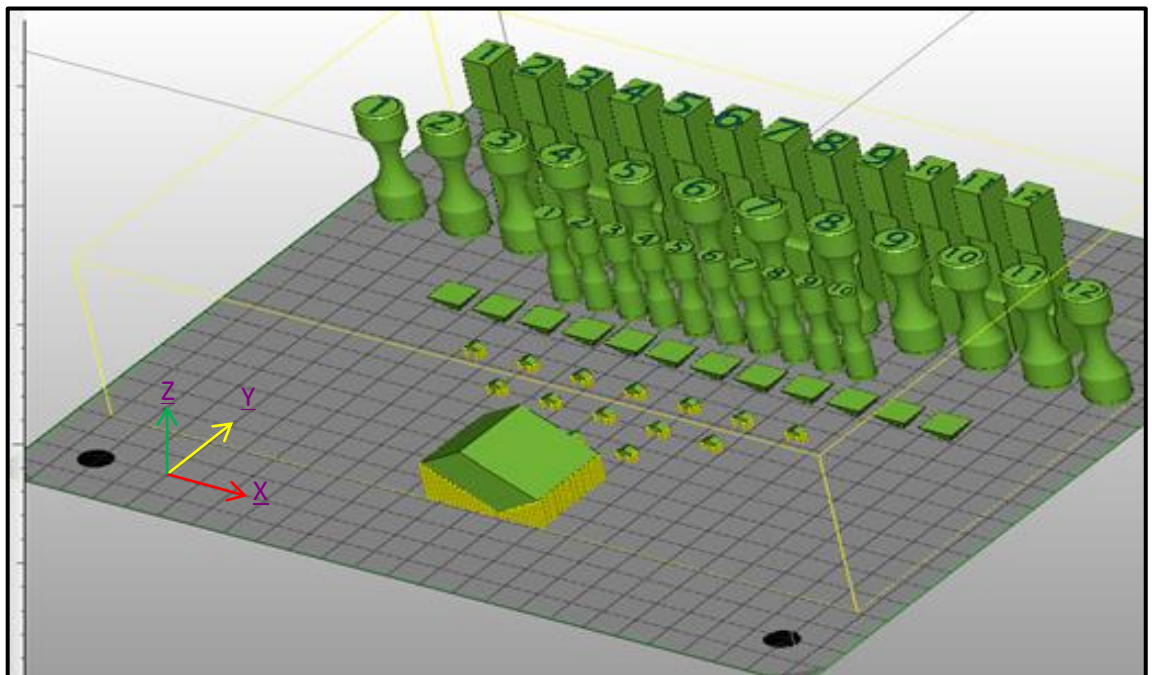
Test Build Image Showing Parts to be Laser Melted
